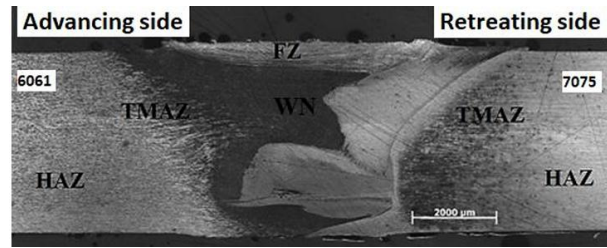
Cross-sectional image of the welded joint created by friction stir welding
